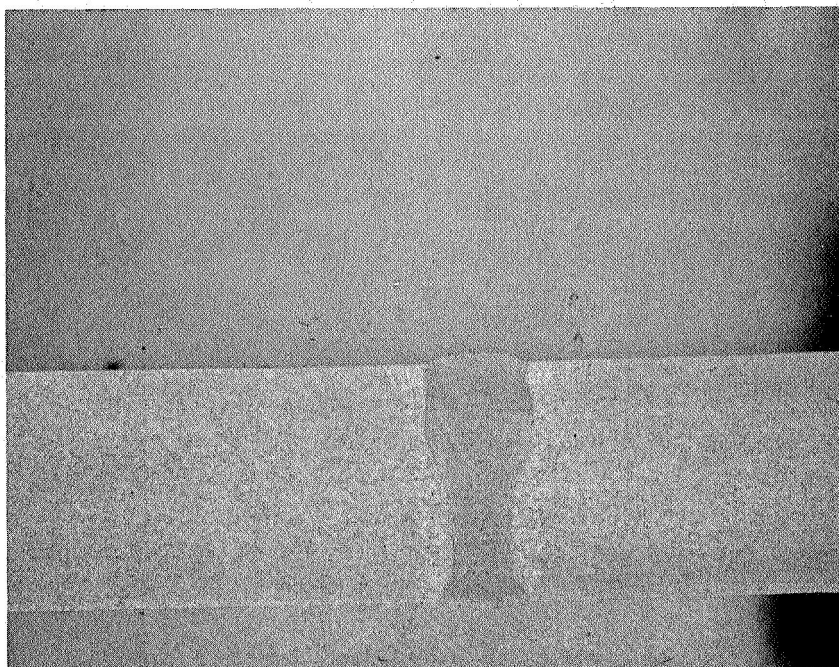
Weld Cross Section and X-ray Photograph of Weld No. 392,
